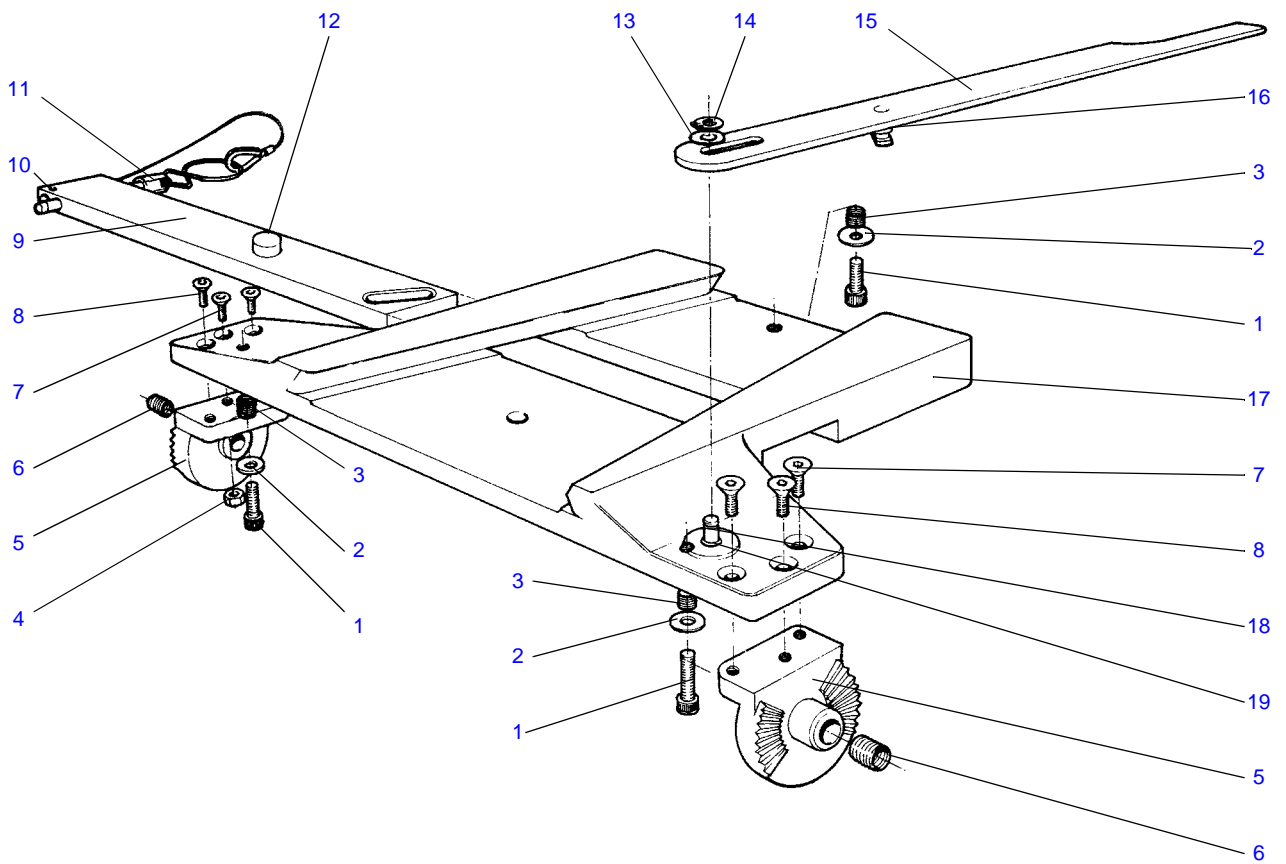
Mk 5 Pan and Tilt Head - Platform Assembly
